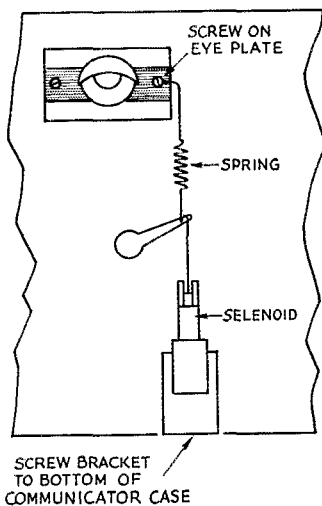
Sketch showing details of Communicator I and II push-to-talk feature.
